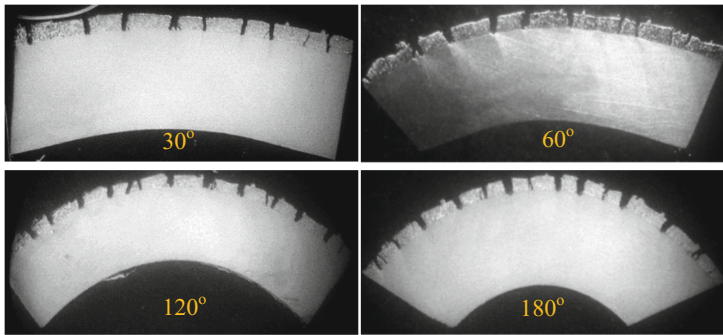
Macroscopic view of the bend test samples bent at different degrees for the tungsten carbide-Ni alloy composite cladded SA-210 A1 boiler tube samples
